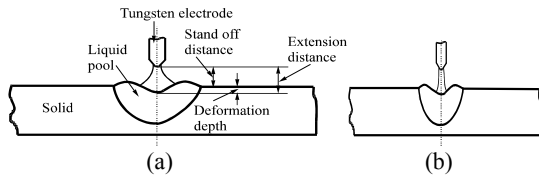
Arc Behavior and Weld Pool Surface.
